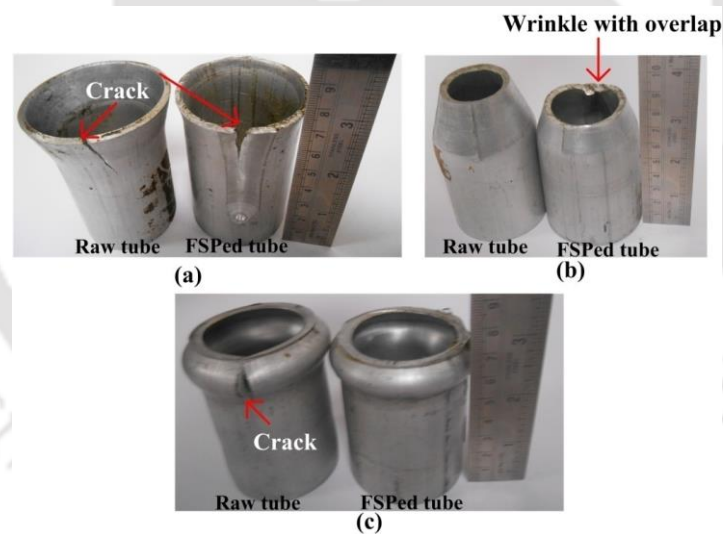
Instabilities in, (a) end expansion, (b) end reduction, and (c) end beading
